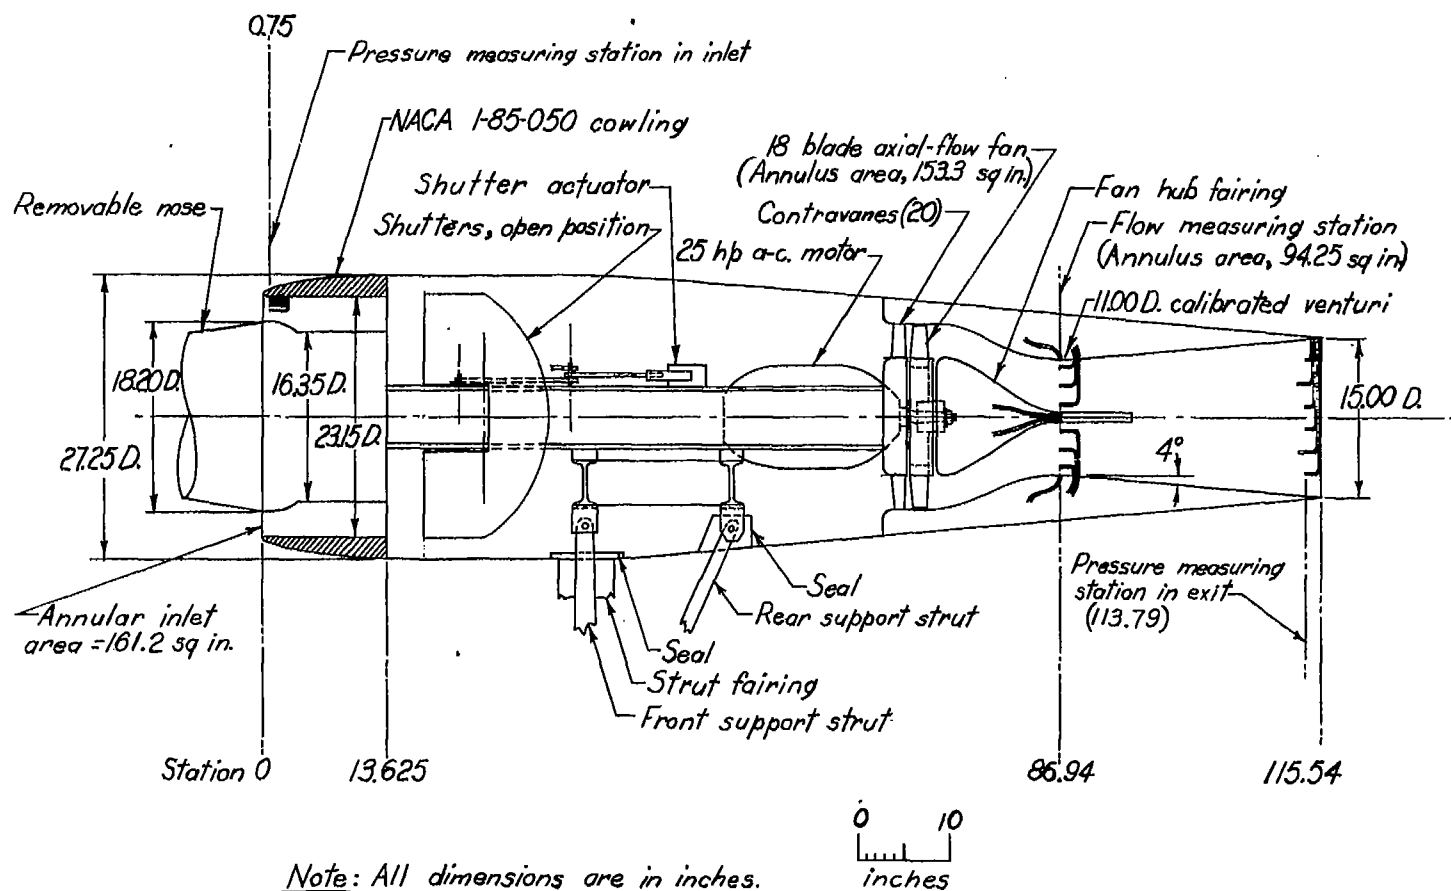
Schematic drawing of body of model showing the arrangement, instrumentation, and principal dimensions.
